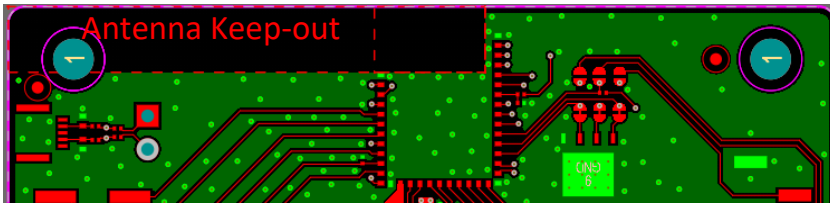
PCB trace Antenna keep-out area (shown in red), corner of the BL54L15 development board for the 453-00001 module.
